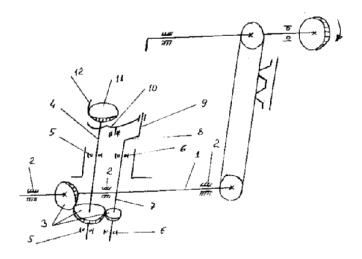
Schematic of the shuttle mechanism of the 862 class machine. In the picture: 1-horizontal shaft. 2 routers. 3 External gear couplings. 4- shuttle shaft. 5,6-rolling bearings. 7 Exhaust shaft. 8- curvature. 9- th finger 10- th exciter lever. 11- shuttle. 12- shuttle nose
